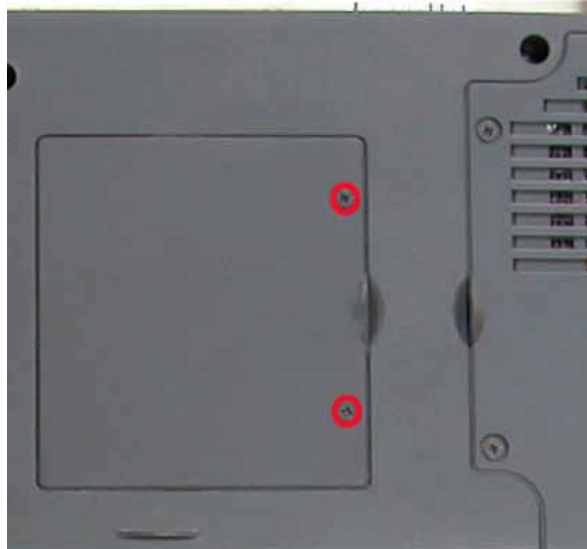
Removing the screws screw retaining the mini PCI slot cover
